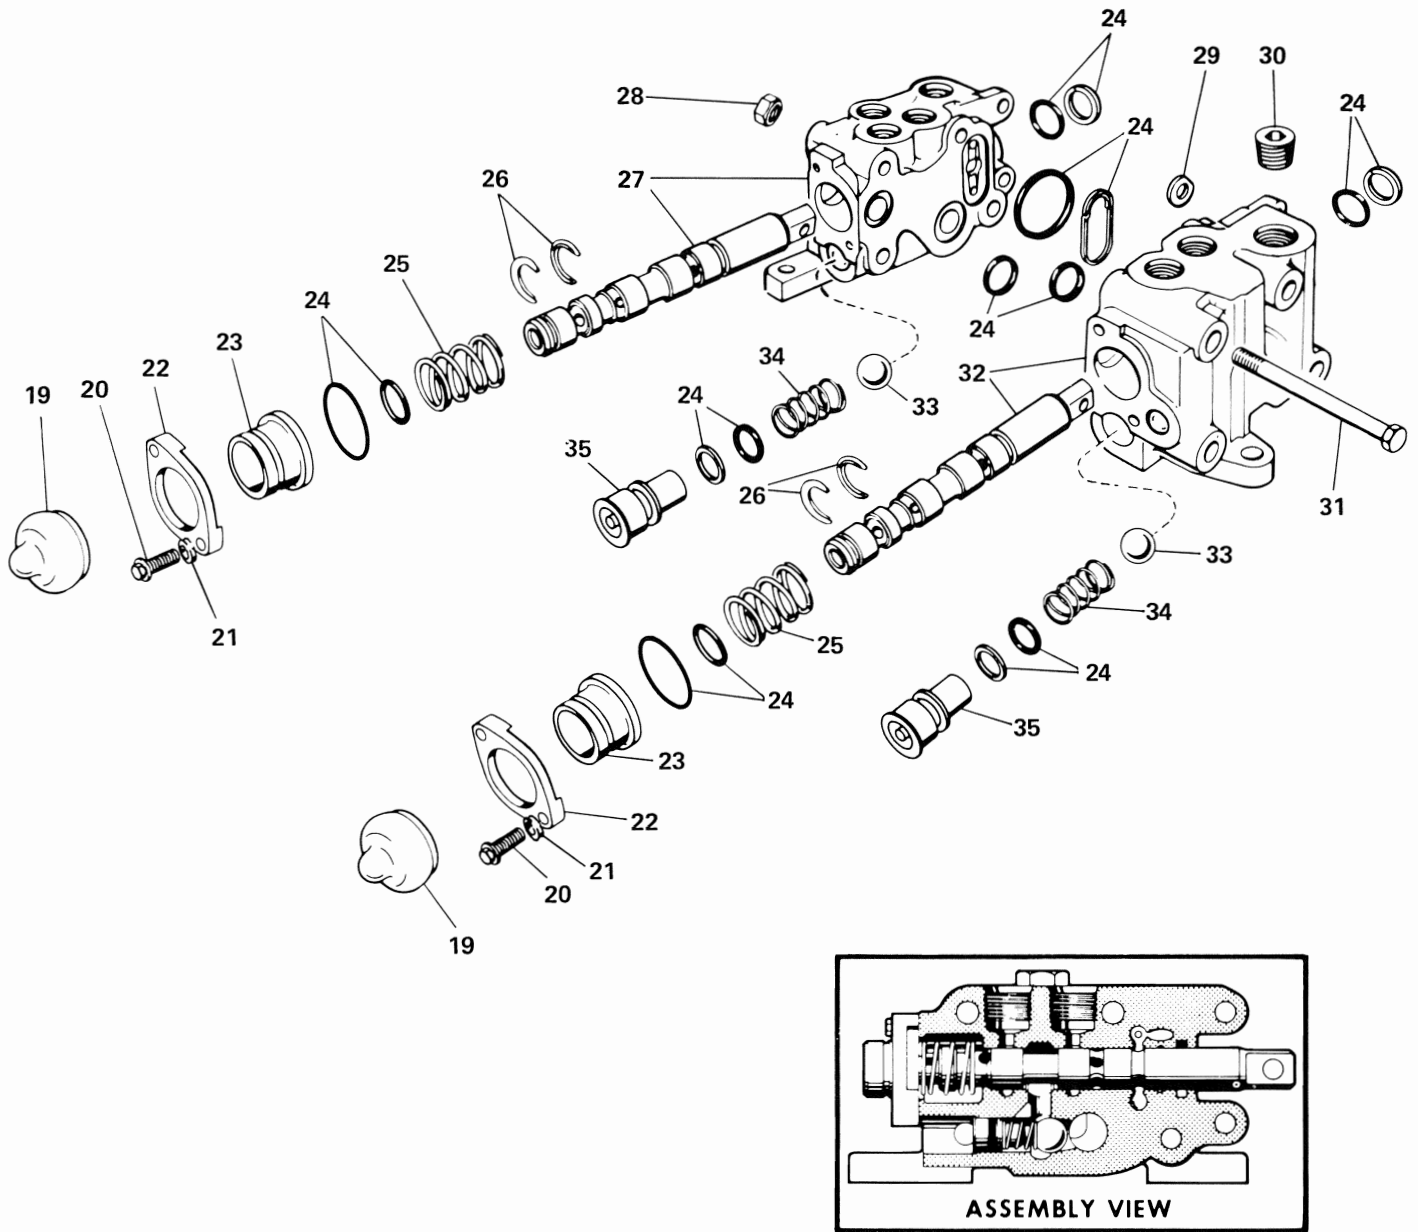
RH Direction Control Lift and Torque Valve Assembly (Sheet 2 of 2)
